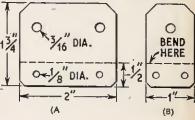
(above). Drilling details of the 16 s.w.g. aluminium angle brackets for mounting the silicon rectifiers. DI and D2 are mounted on bracket A and D3 and D4 are mounted on two brackets to the dimensions of B
